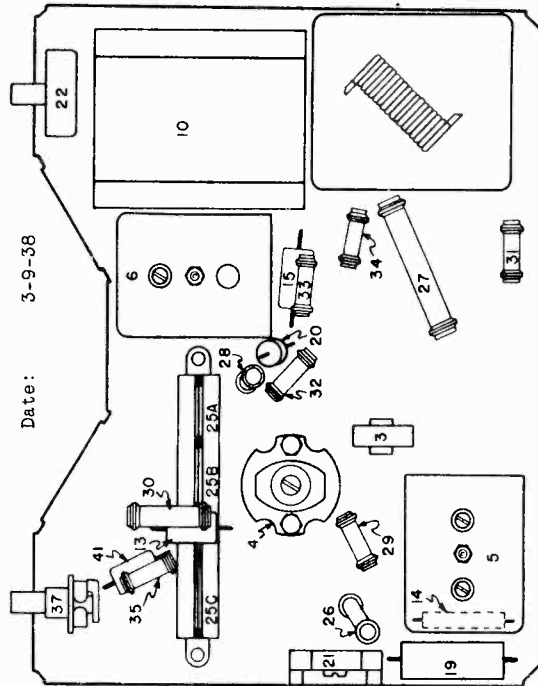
PARTS LAYOUT--BOTTOM VIEW
